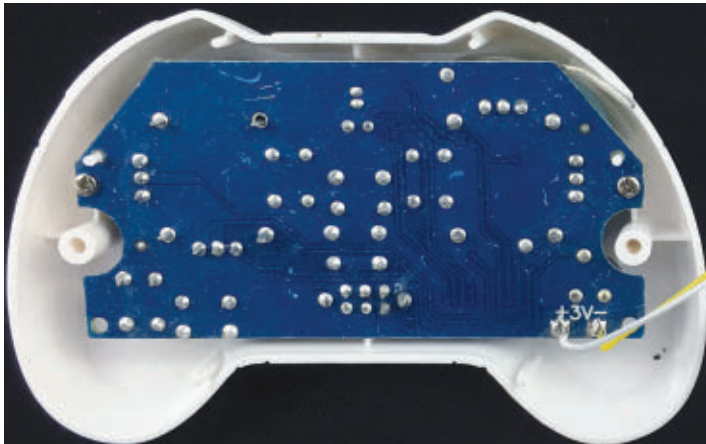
There are 10 solder joints that hold the joystick assemblies into position on the PCB: six for the potentiometers and four for the mechanical assembly. The soldering quality on these is questionable. Notice the completely dry joint in the upper left corner of the PCB.
